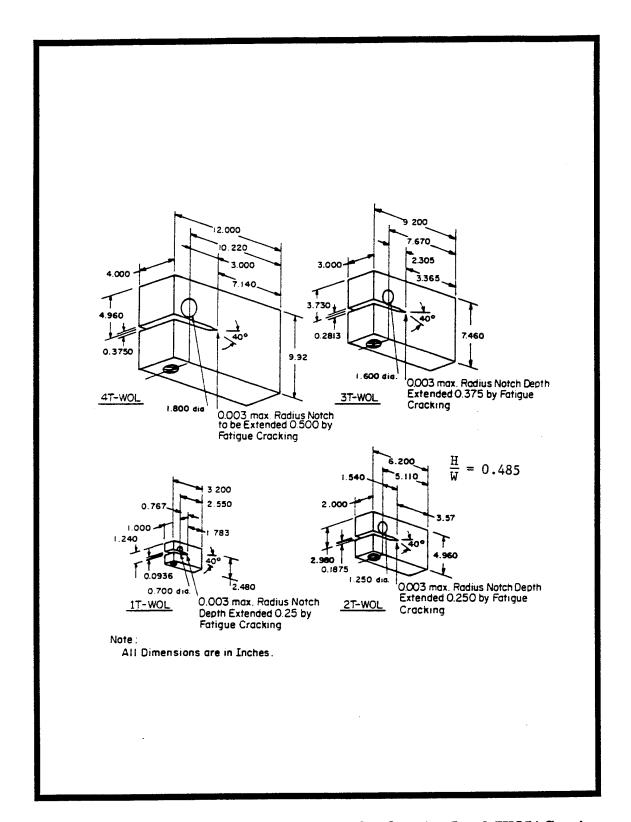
Dimensions of Several T Type Wedge Opening Load (WOL) Specimens.
